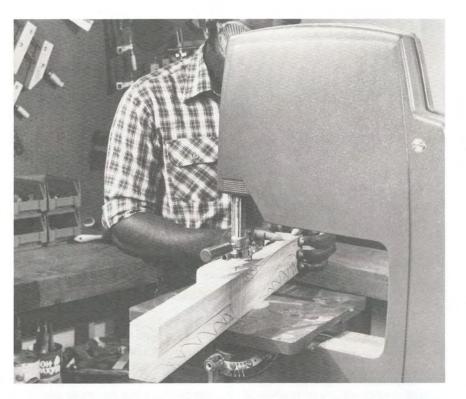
To make a compound cut, begin by cutting a pattern in a workpiece as you would normally, but save the waste.
